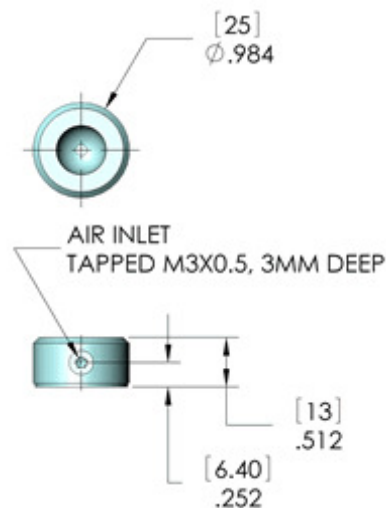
A drawing of the FP-C-010 aerostatic bearing, the length unit is mm in the brackets and is inch outside the brackets [15].
